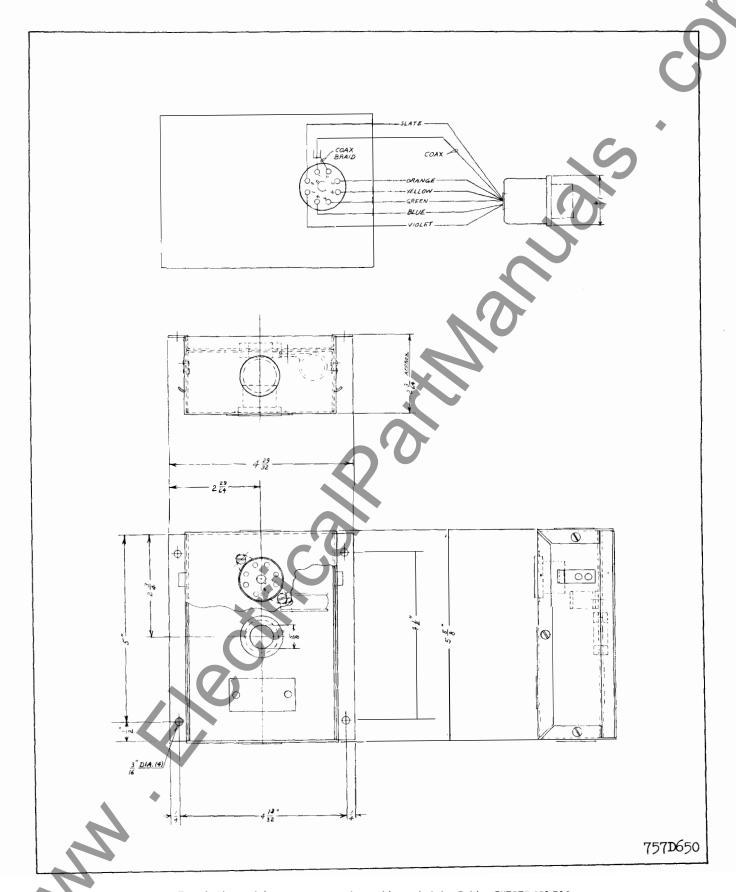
Voice Adapter Mounting Assembly with 6 ft. Cable, \$757D650G03.
